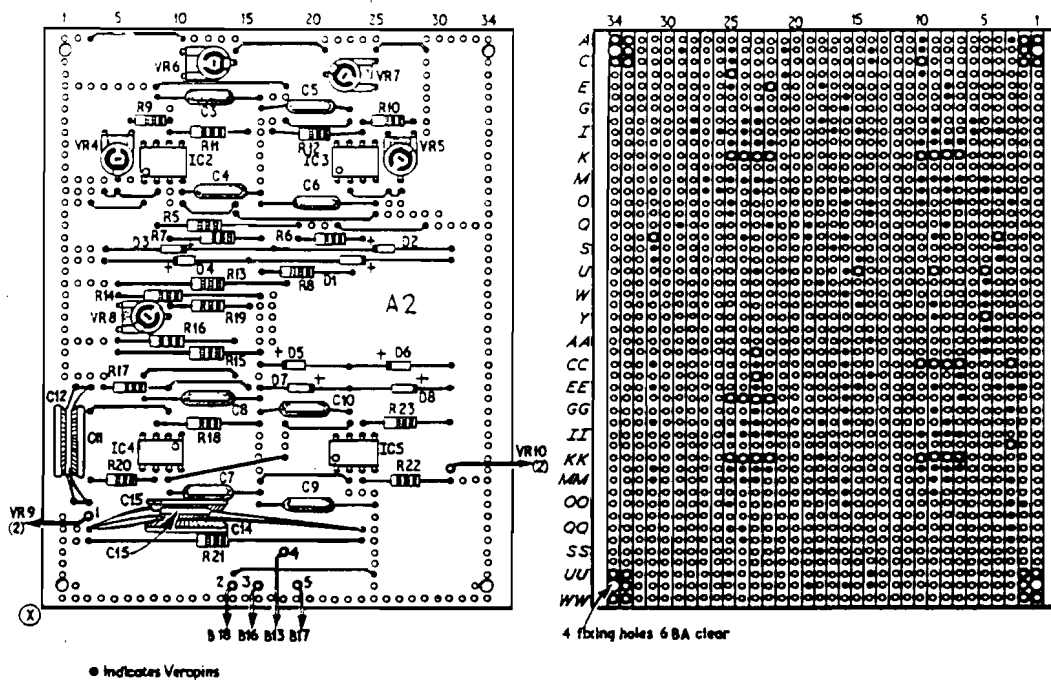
Component layout and wiring for Board A. Two of these are required as shown in Fig. 3.5
